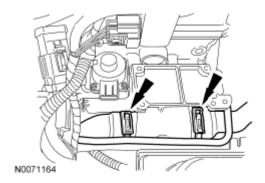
Locating Catalytic Converter Heat Shield And Bolts Courtesy of FORD MOTOR CO.
